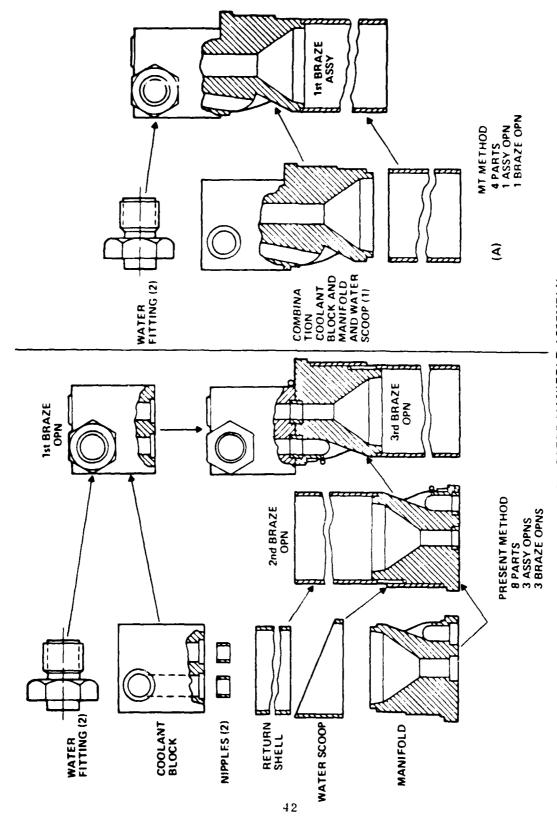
COLLECTOR MANIFOLD ASSEMBLY
